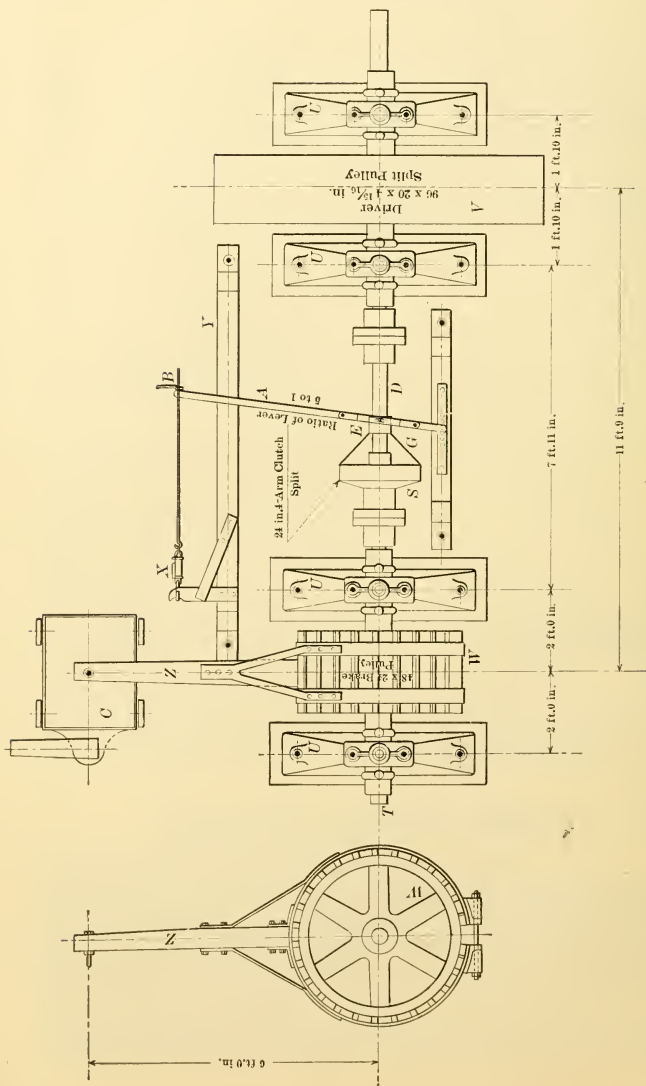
DYNAMIC CLUTCH-TESTING MACHINE.]
